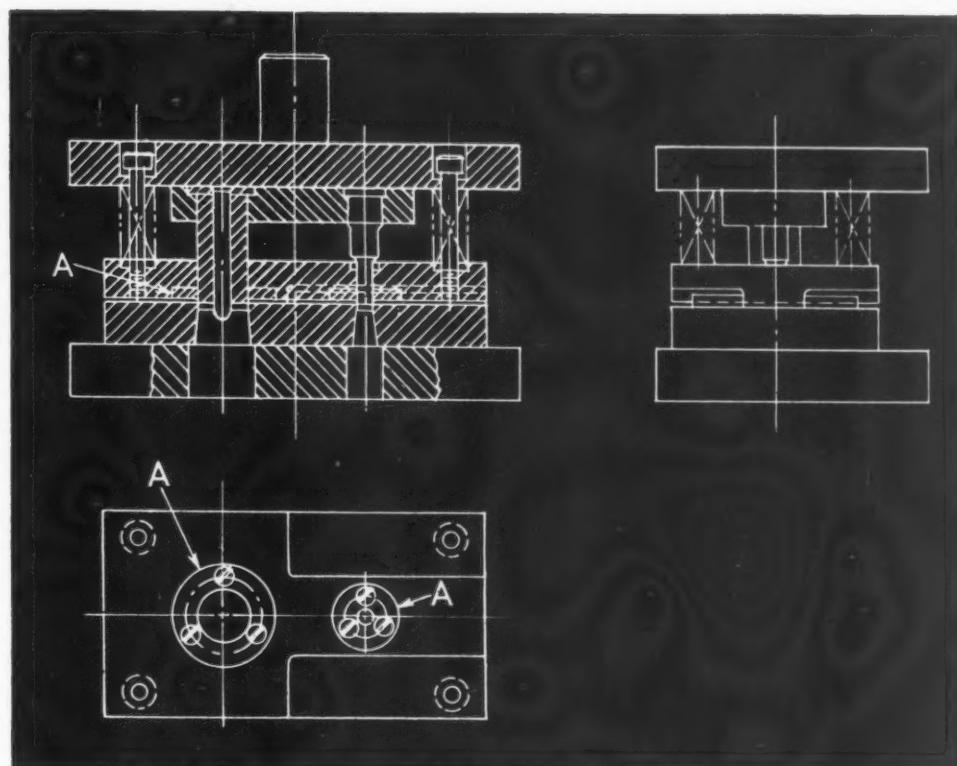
Spring Type Stripper Made of Machine Steel and Provided with Hardened Tool-steel Inserts around the Punches
